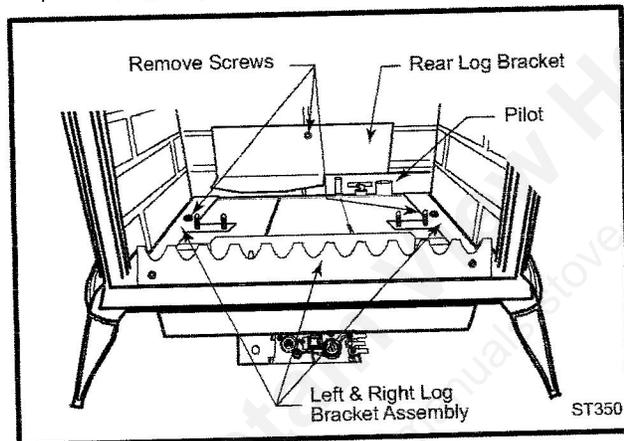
Remove rear log bracket and left and right log bracket assembly.
